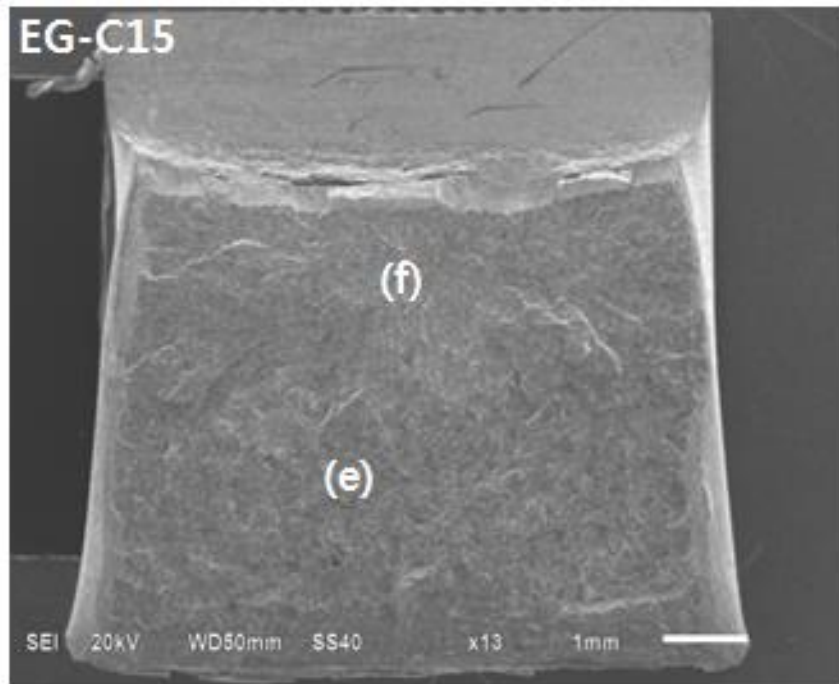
Fractographs of Charpy impact specimens fractured at 0°C for the EG-C15 fusion line +2mm specimen
